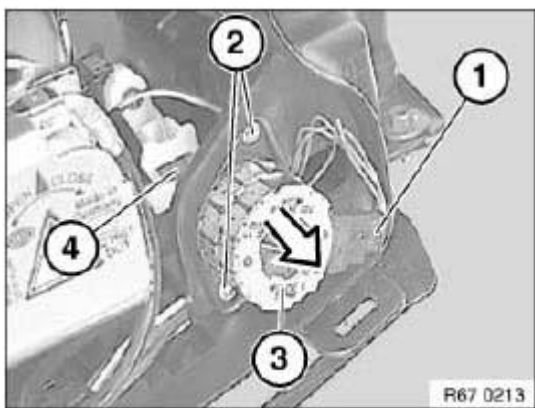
Feeding Headlight Vertical Aim Adjuster Out Of Mounting
